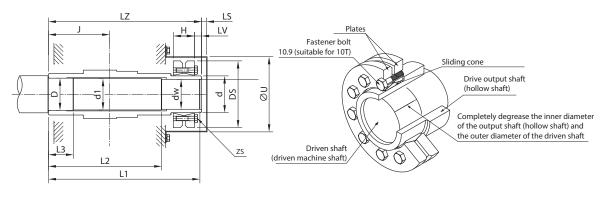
Shrink disk system Output shaft (hollow shaft) dimensions
